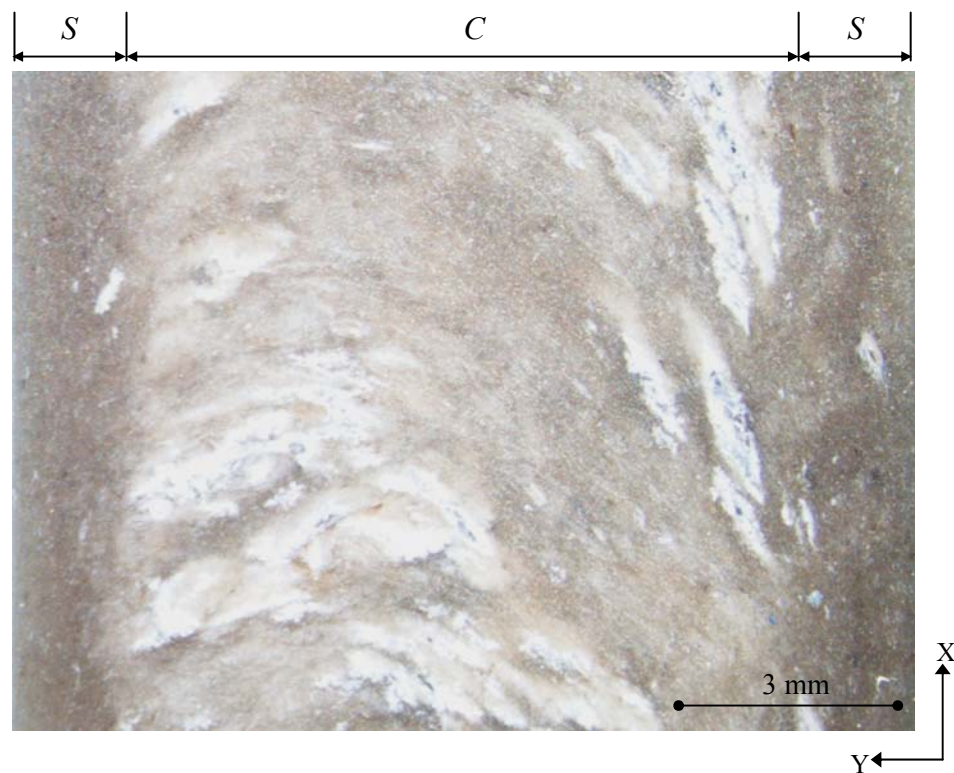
Macroscopic plan view of a test specimen with half the thickness removed, showing a distinct core layer (C), and two skin layers (S).
